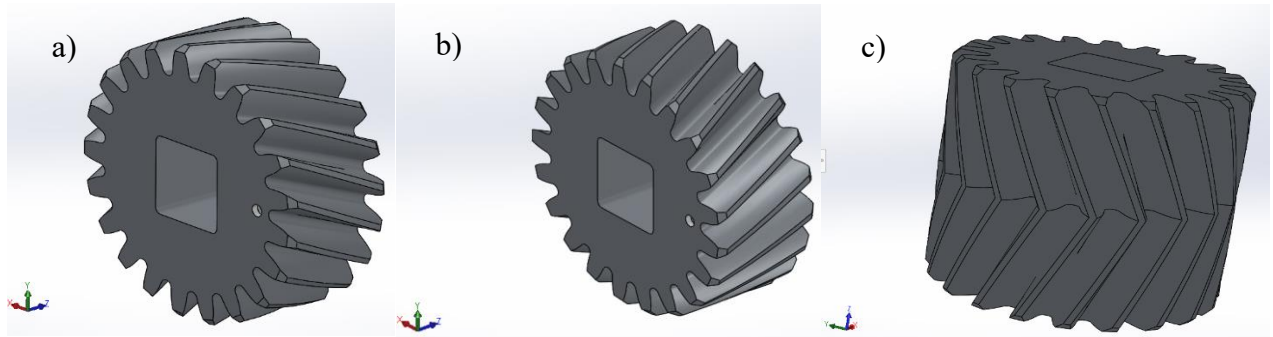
CAD model of gear wheels: gear wheel 21l (a) and gear wheel 21r (b), with specular tothing angles, and gear wheel 20 (c), double-helical
